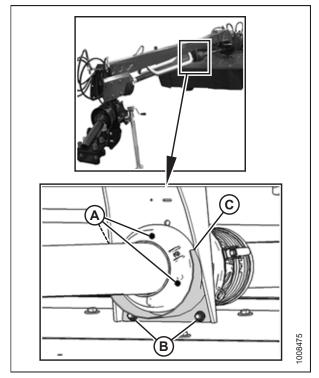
Driveline Cover and Shield Installed at Center Support
